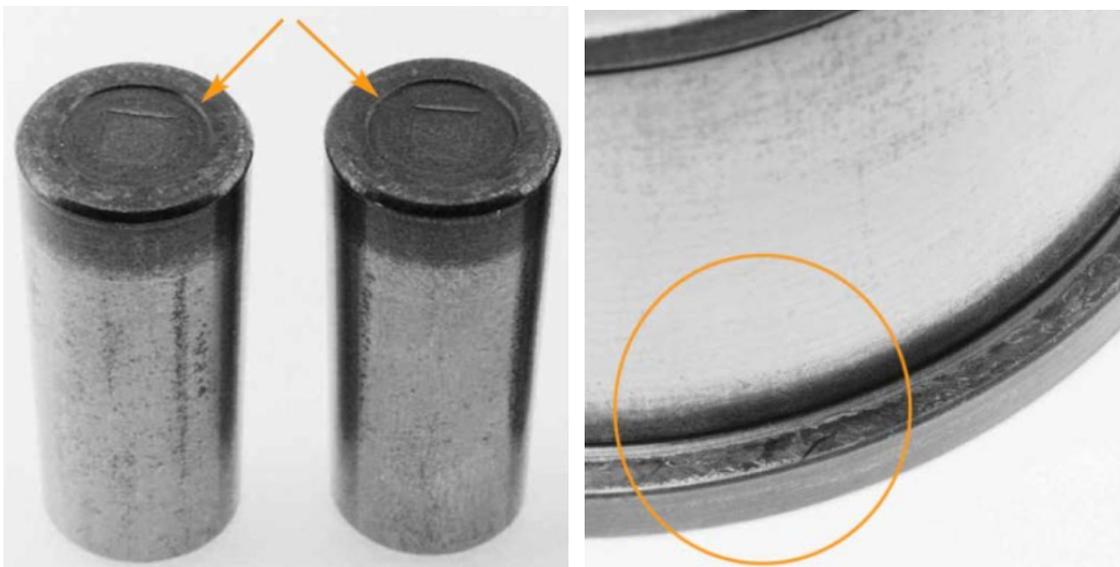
Excessive Scoring at Roller Ends (Left) and Rib Face (Right)
